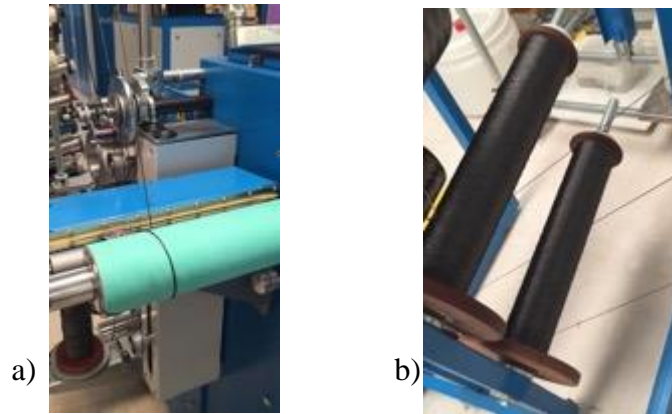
a) winding machine transferring the cordage from the bottle to a cardboard roller; b) two metal support (bottle) with one strand on it
